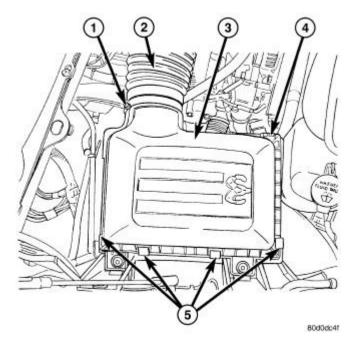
AIR CLEANER COVER Courtesy of CHRYSLER LLC
